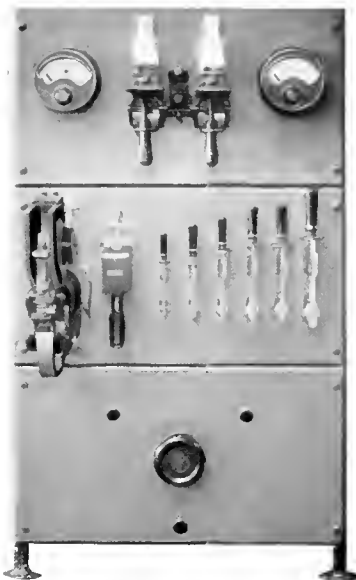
Control Panel for use with 800 ampere arc welding equipment
